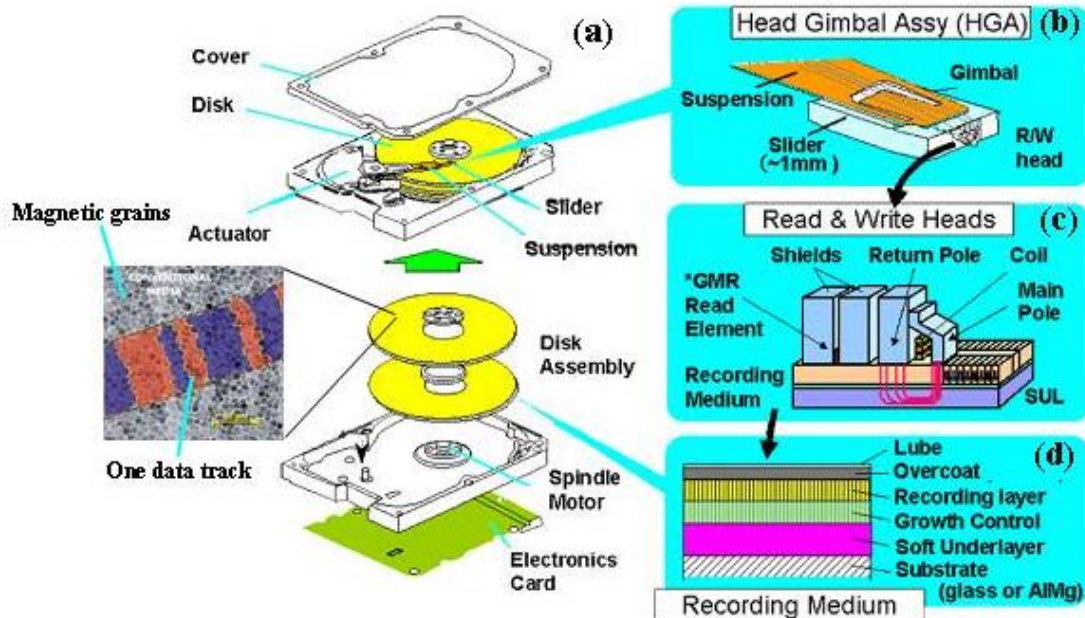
The components of a hard disk drive. The basic design involves a rotating disk plus a rotary actuator that provides the access mechanism for the read/write heads (a). The heads are fabricated onto a ceramic slider that glides just a few nanometers above the surface of the spinning disk (b). A perpendicular recording configuration is illustrated (c) and recording medium constituents (d) are detailed [1].
